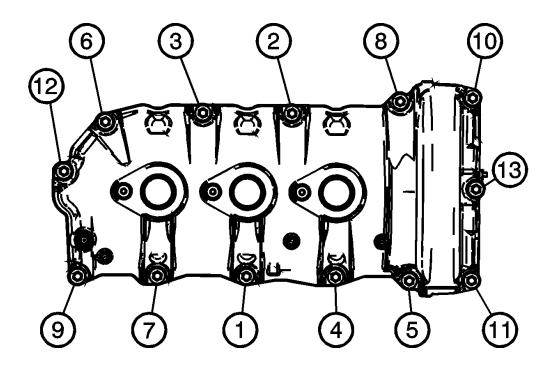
Tightening Sequence for Right Camshaft Cover Bolts Courtesy of GENERAL MOTORS COMPANY
